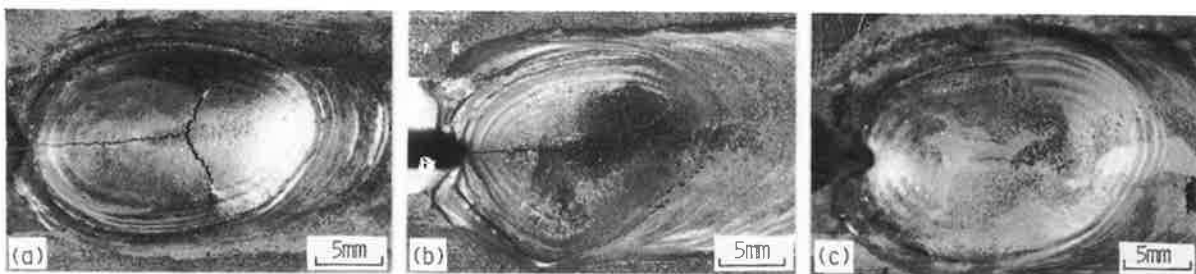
Appearance of cracking in weld crater at the welding condition of 270A and 400 mm/min; (a) 7N01 + 5356, (b) 7N01 + 6MgTiB, (c) 7N01 + 6MgZr
